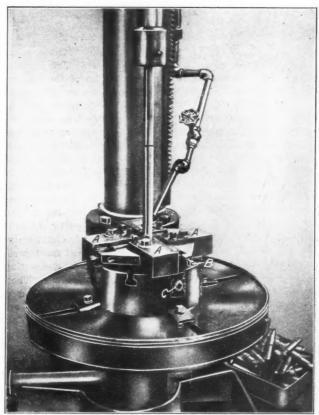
Upright Tap-threading Machine used for Threading Stay-bolt Taps.
